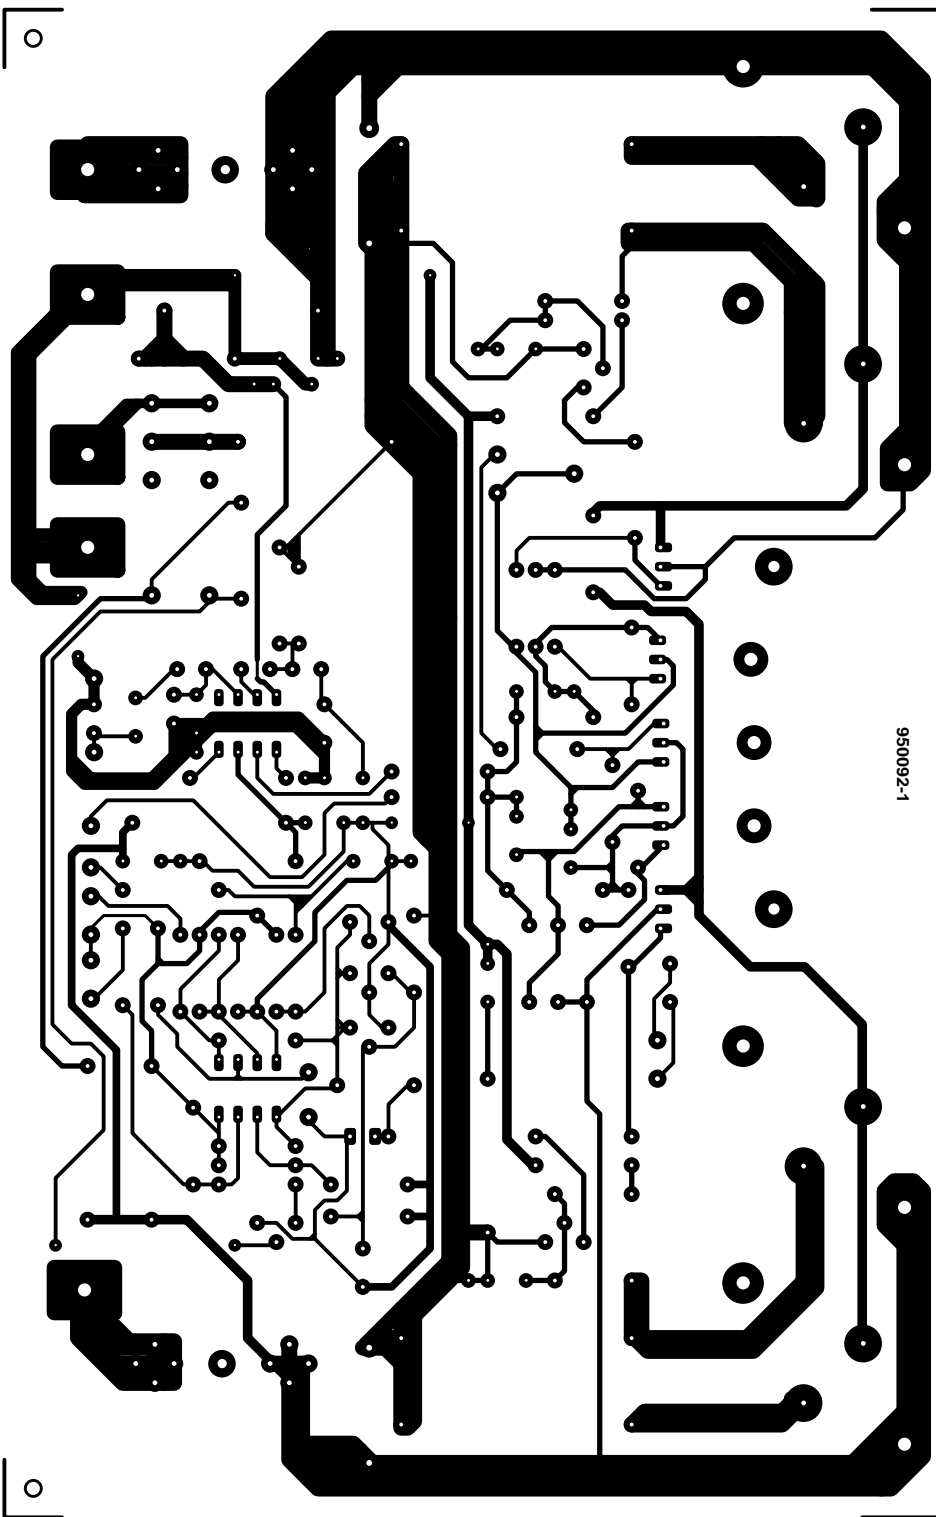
Track layout of the printed-circuit board for the 300 W power amplifier.
